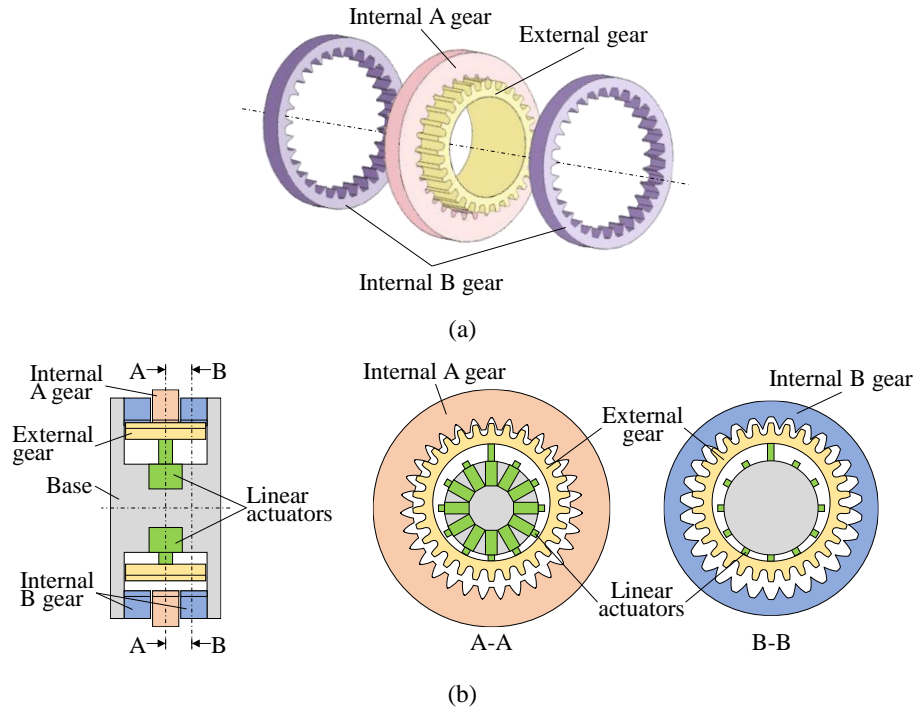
Structure of the proposed reducer-integrated motor. (a) One external gear, one internal A gear, and two internal B gears. (b) Sectional views of the motor.
